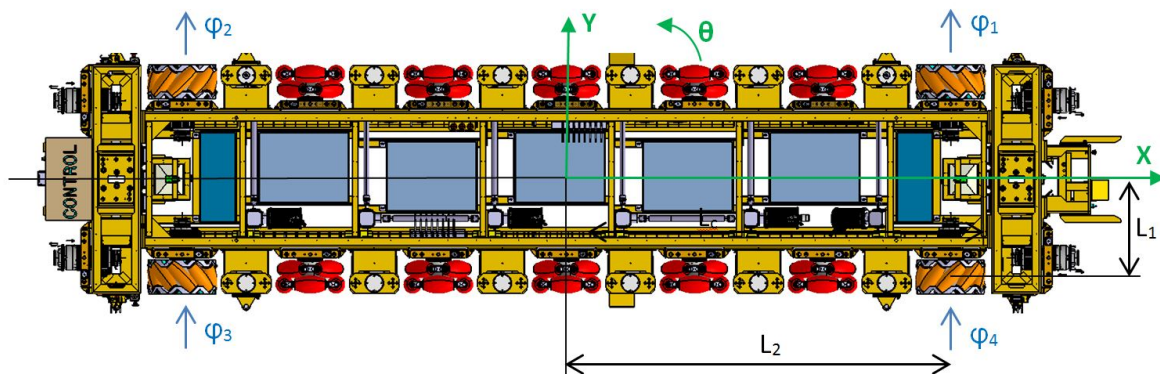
Top view of MW and HTP moulds SAGV with 4 45° Swedish wheels
